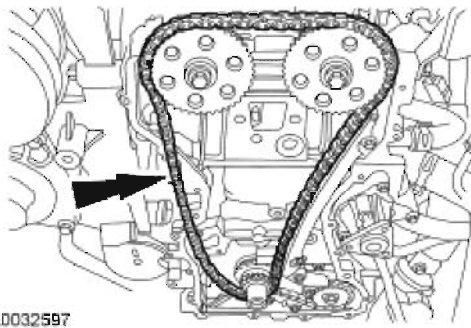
Locating Timing Chain Tensioner Bolt
